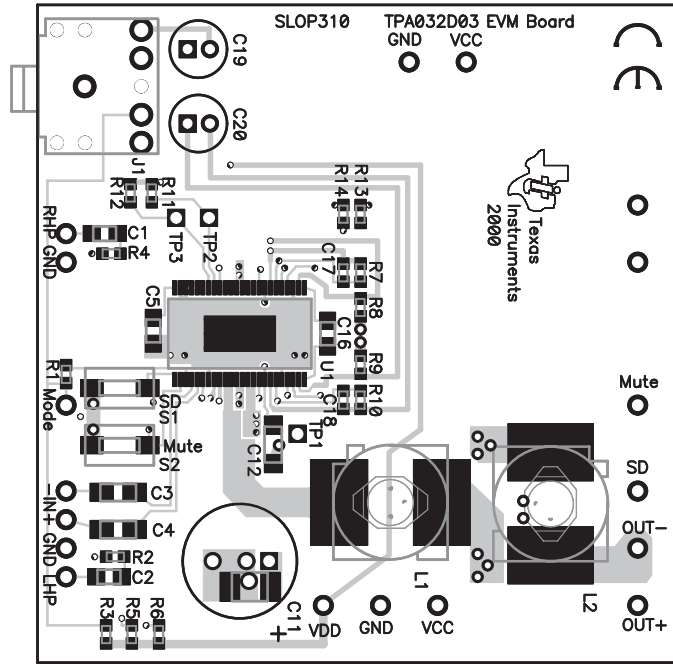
TPA032D03 Class-D EVM Bottom Assembly
